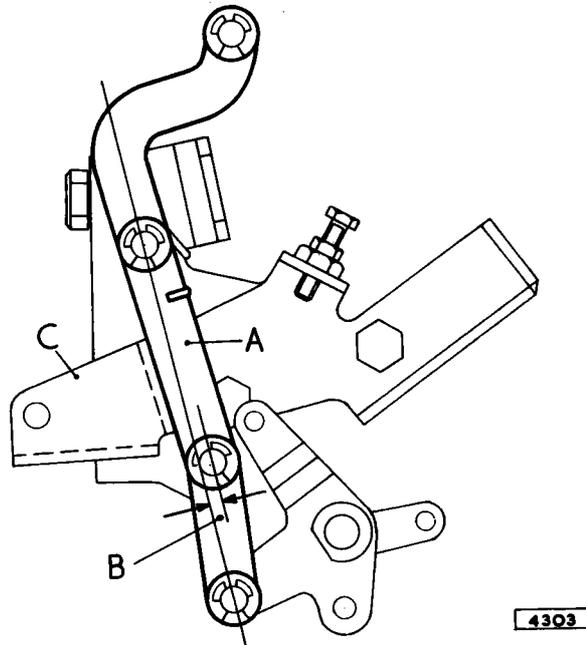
Throttle control linkage setting 'A' Lever, 'B' Clearance 1/8in. (3.2mm.), 'C' stop bracket
